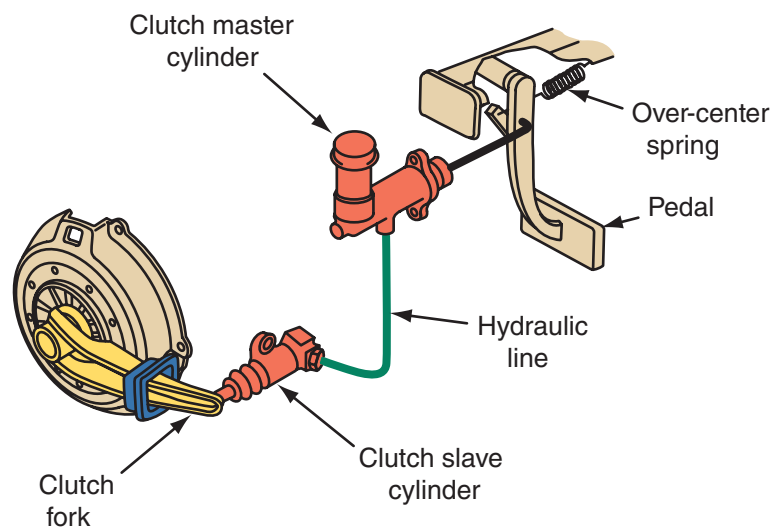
A typical hydraulic clutch linkage arrangement.
